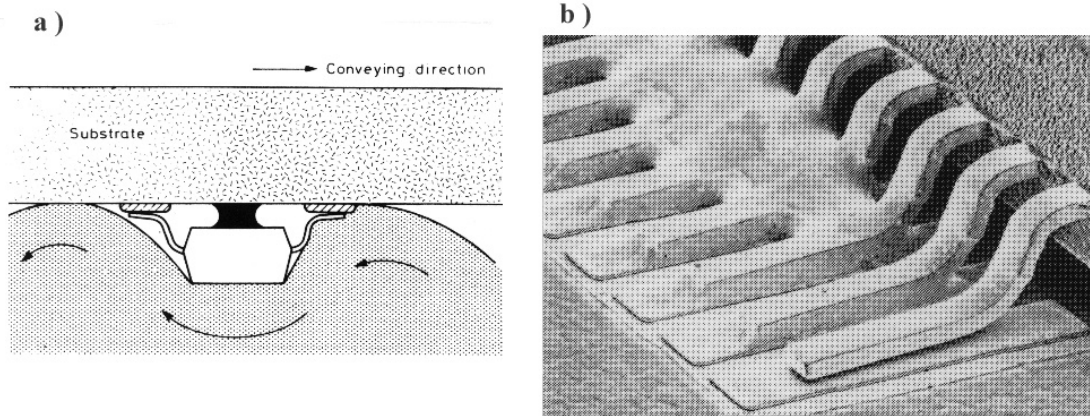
a): Shadowing in SMD wave soldering, b): Solder bridging on fine pitch package.
